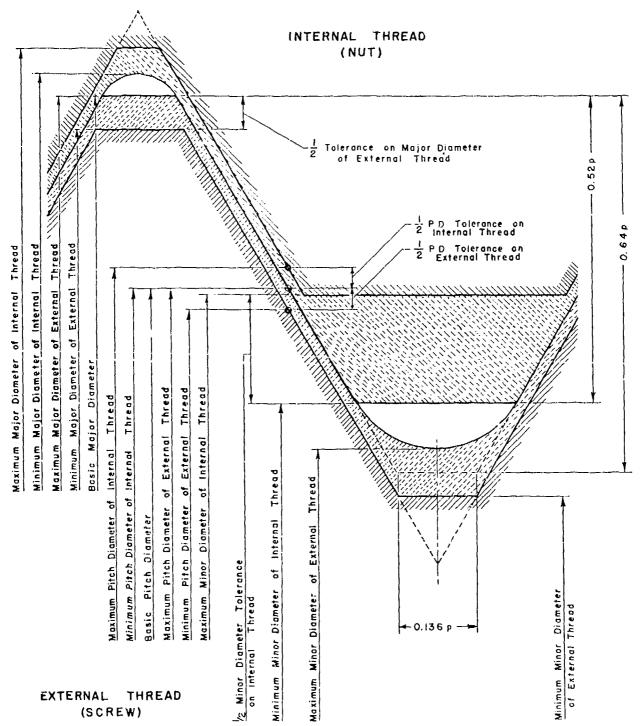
Disposition of tolerances and crest clearances, National Miniature threads.
